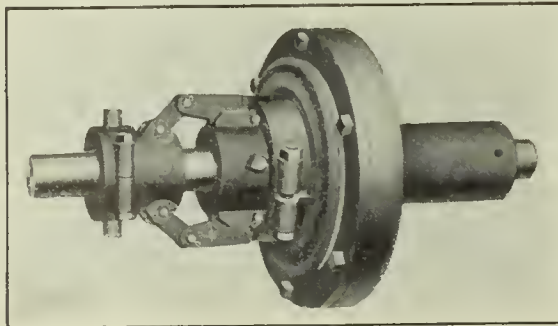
EXTERIOR VIEW OF LEMLEY CLUTCH
